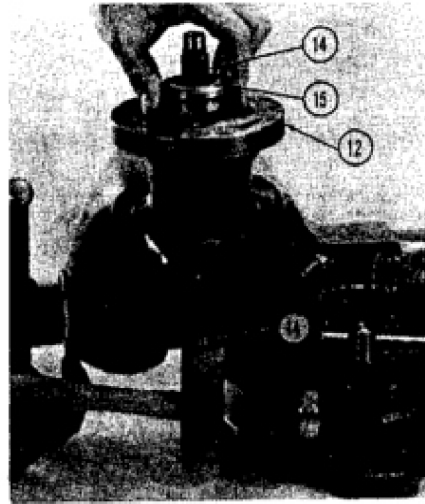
Tap on outer end of actuator shaft (14) to bump bearing support (15) from the housing (12).
